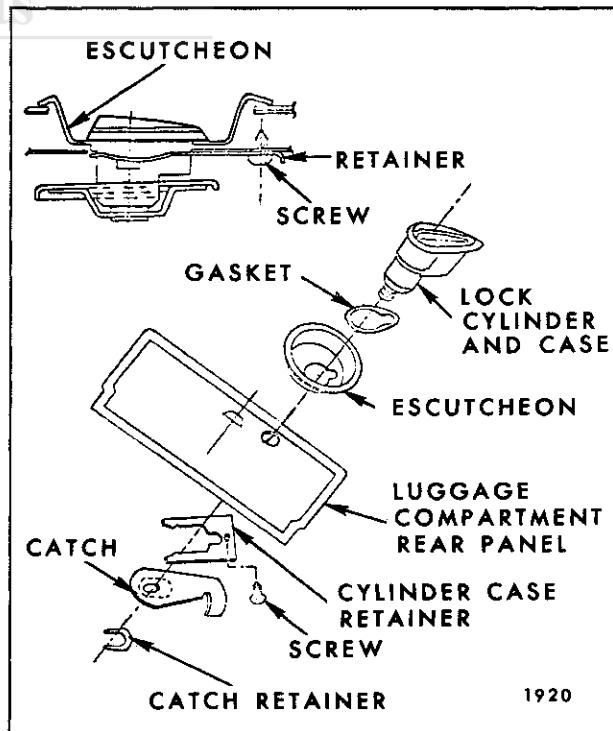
Luggage Compartment Lock Chevrolet - "B" Styles
